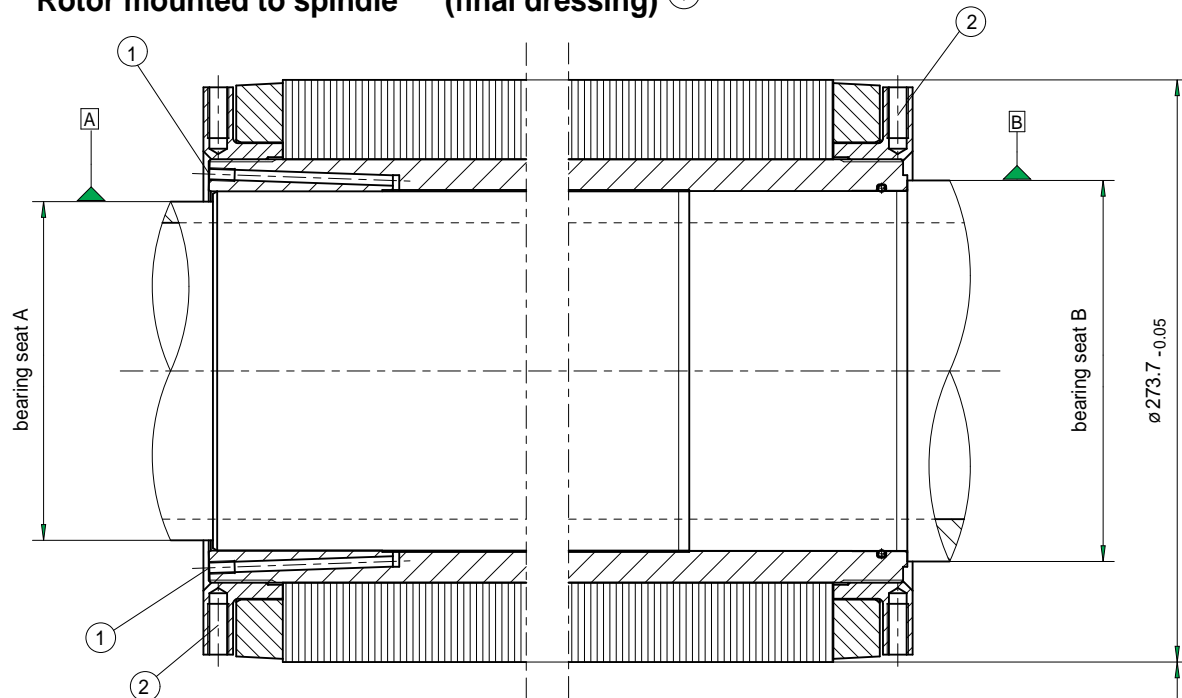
1MB 375 frameless spindle motor - dimensional data (part 2)
